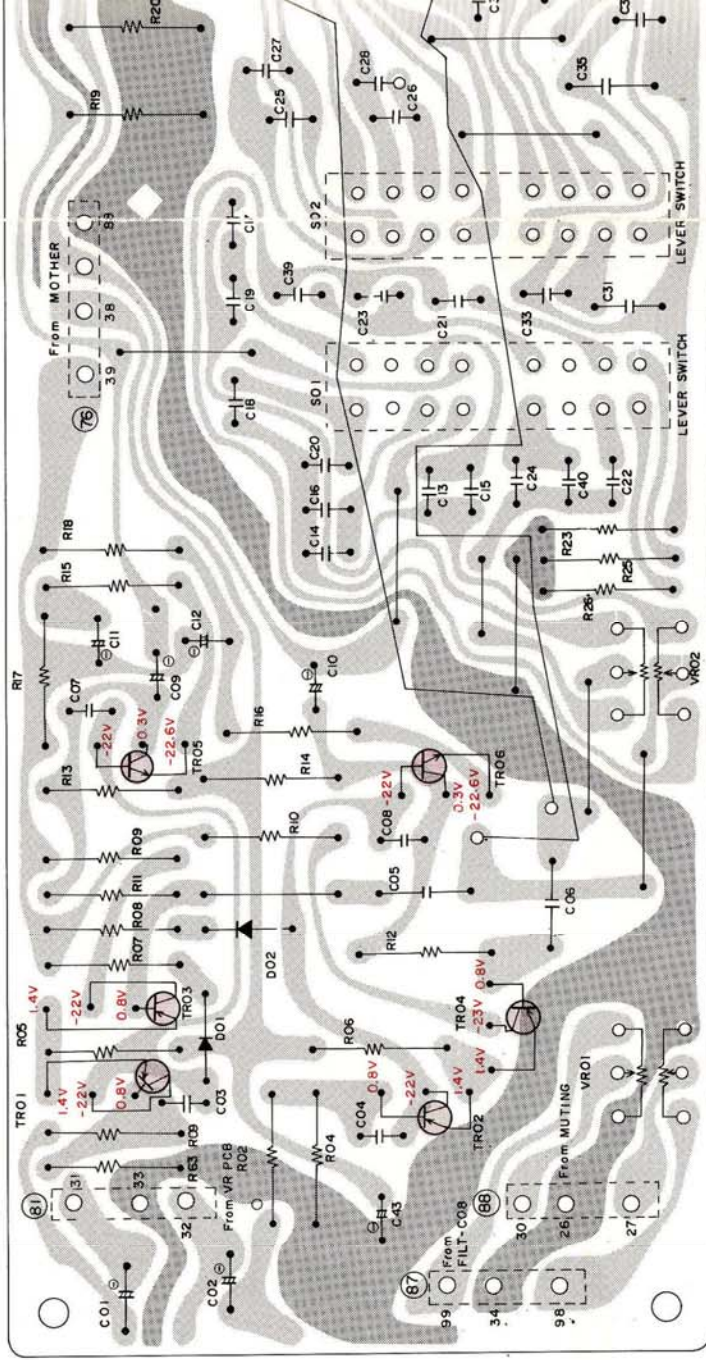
Solder Side of Pin Jack P.C. Board (PIN-C07) & Solder Side
